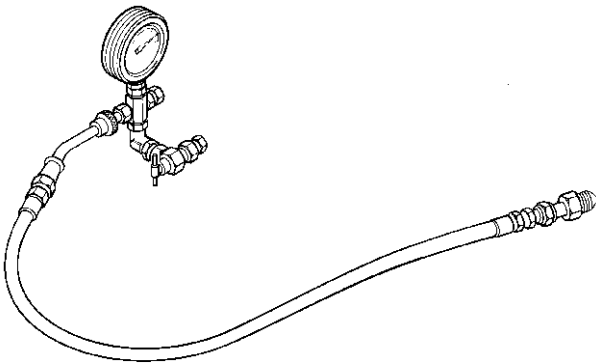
892/01042 Nitrogen Charging Tool Kit
